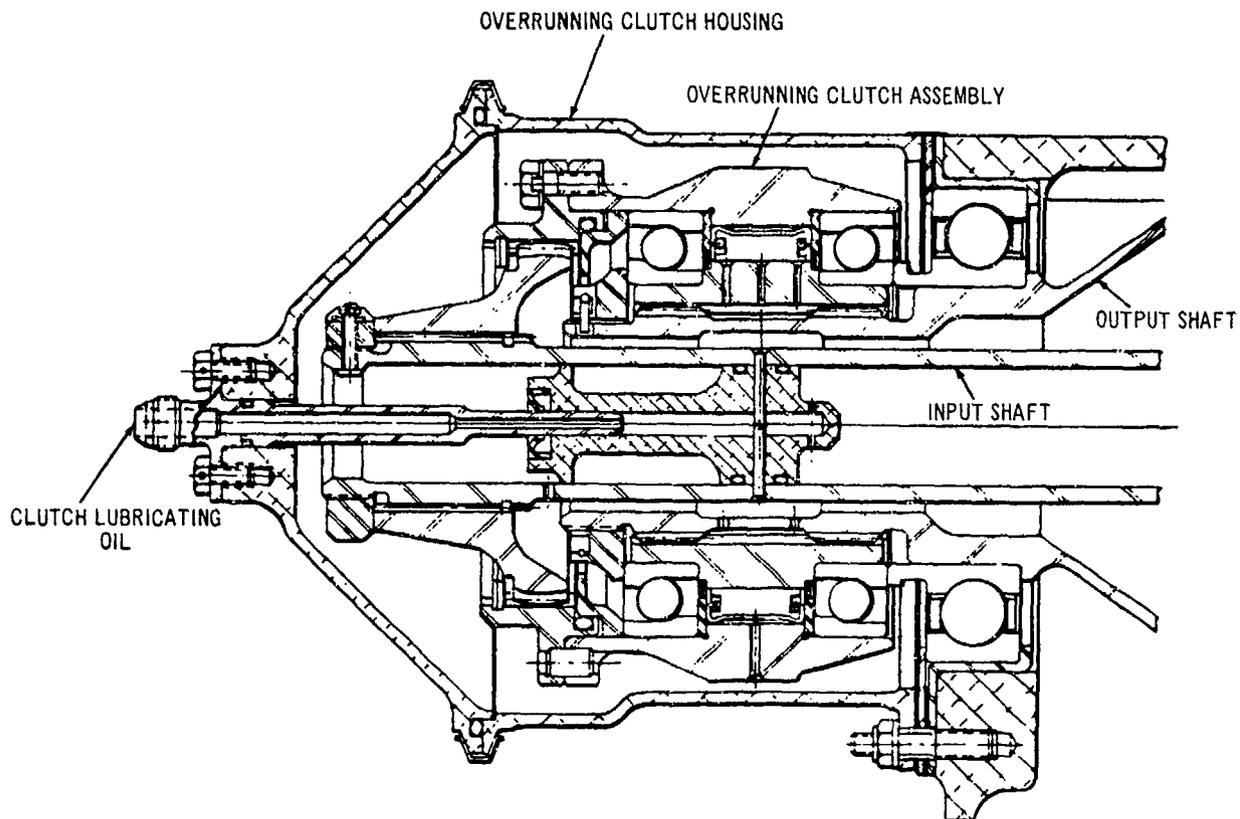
Partial View of UH-2C Gearbox Assembly Showing Overrunning Clutch Installation
